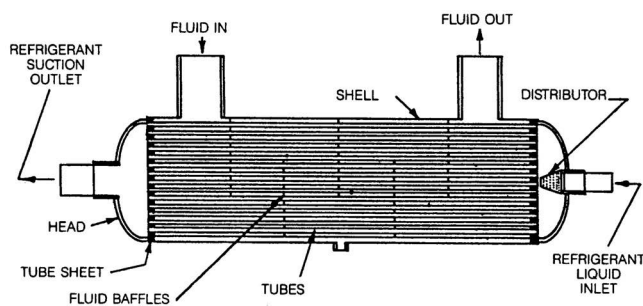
Direct-Expansion Shell-and-Tube Cooler
